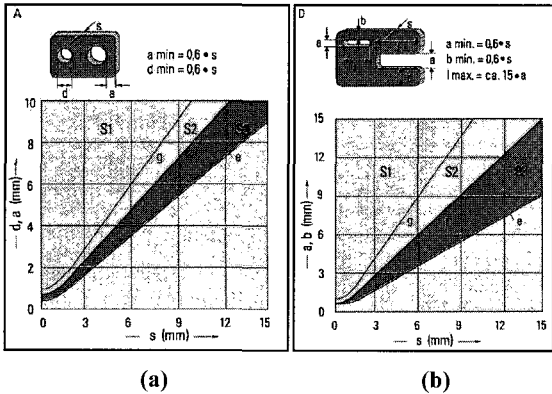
Fine blanking design guide for (a) hole & web and (b) slot & web
